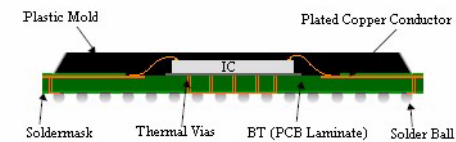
'Cavity-Up' Ball Grid Array Package
